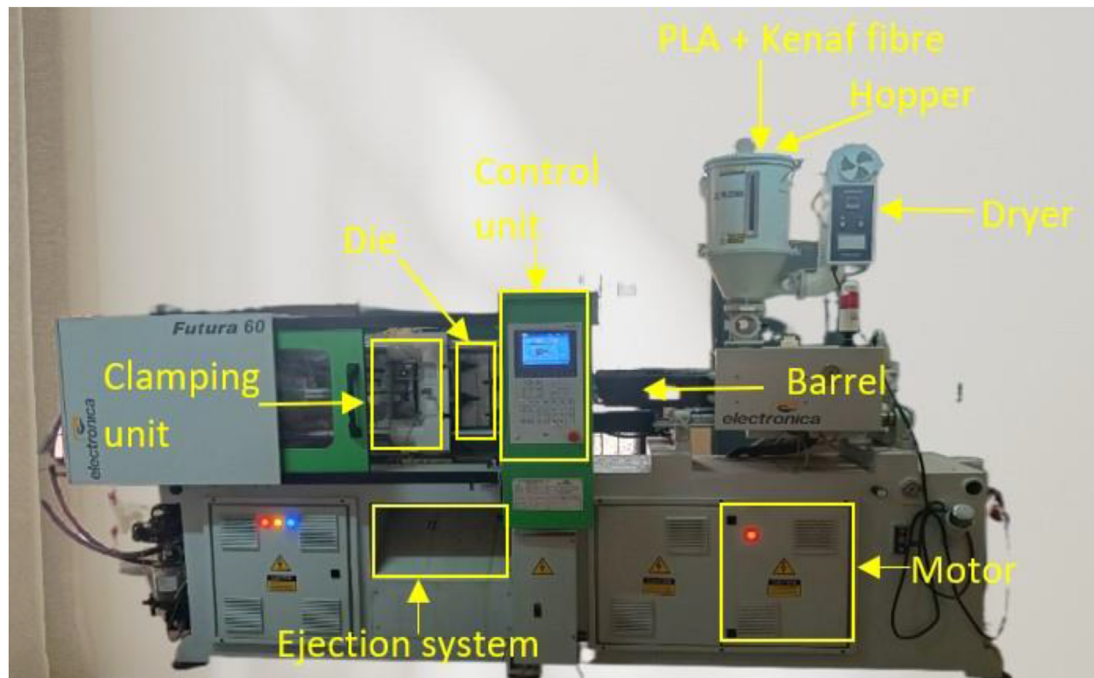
Schematic representation of the Futura 60 injection molding machine, illustrating its key components.
